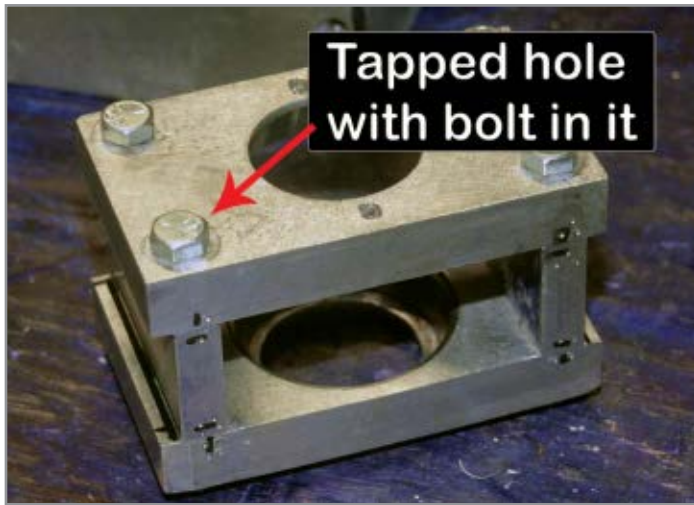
This is a very good example of appropriately using a tapped hole. Notice the top and bottom plates both screw into the uprights. This allows for quick assembly and disassembly.
